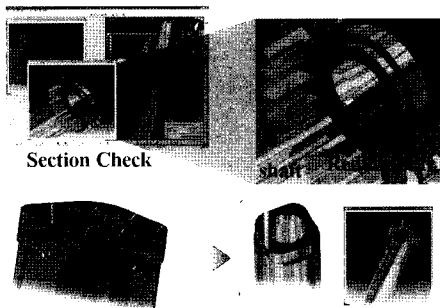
Clash & section check about shaft2 & reduce gear 2
